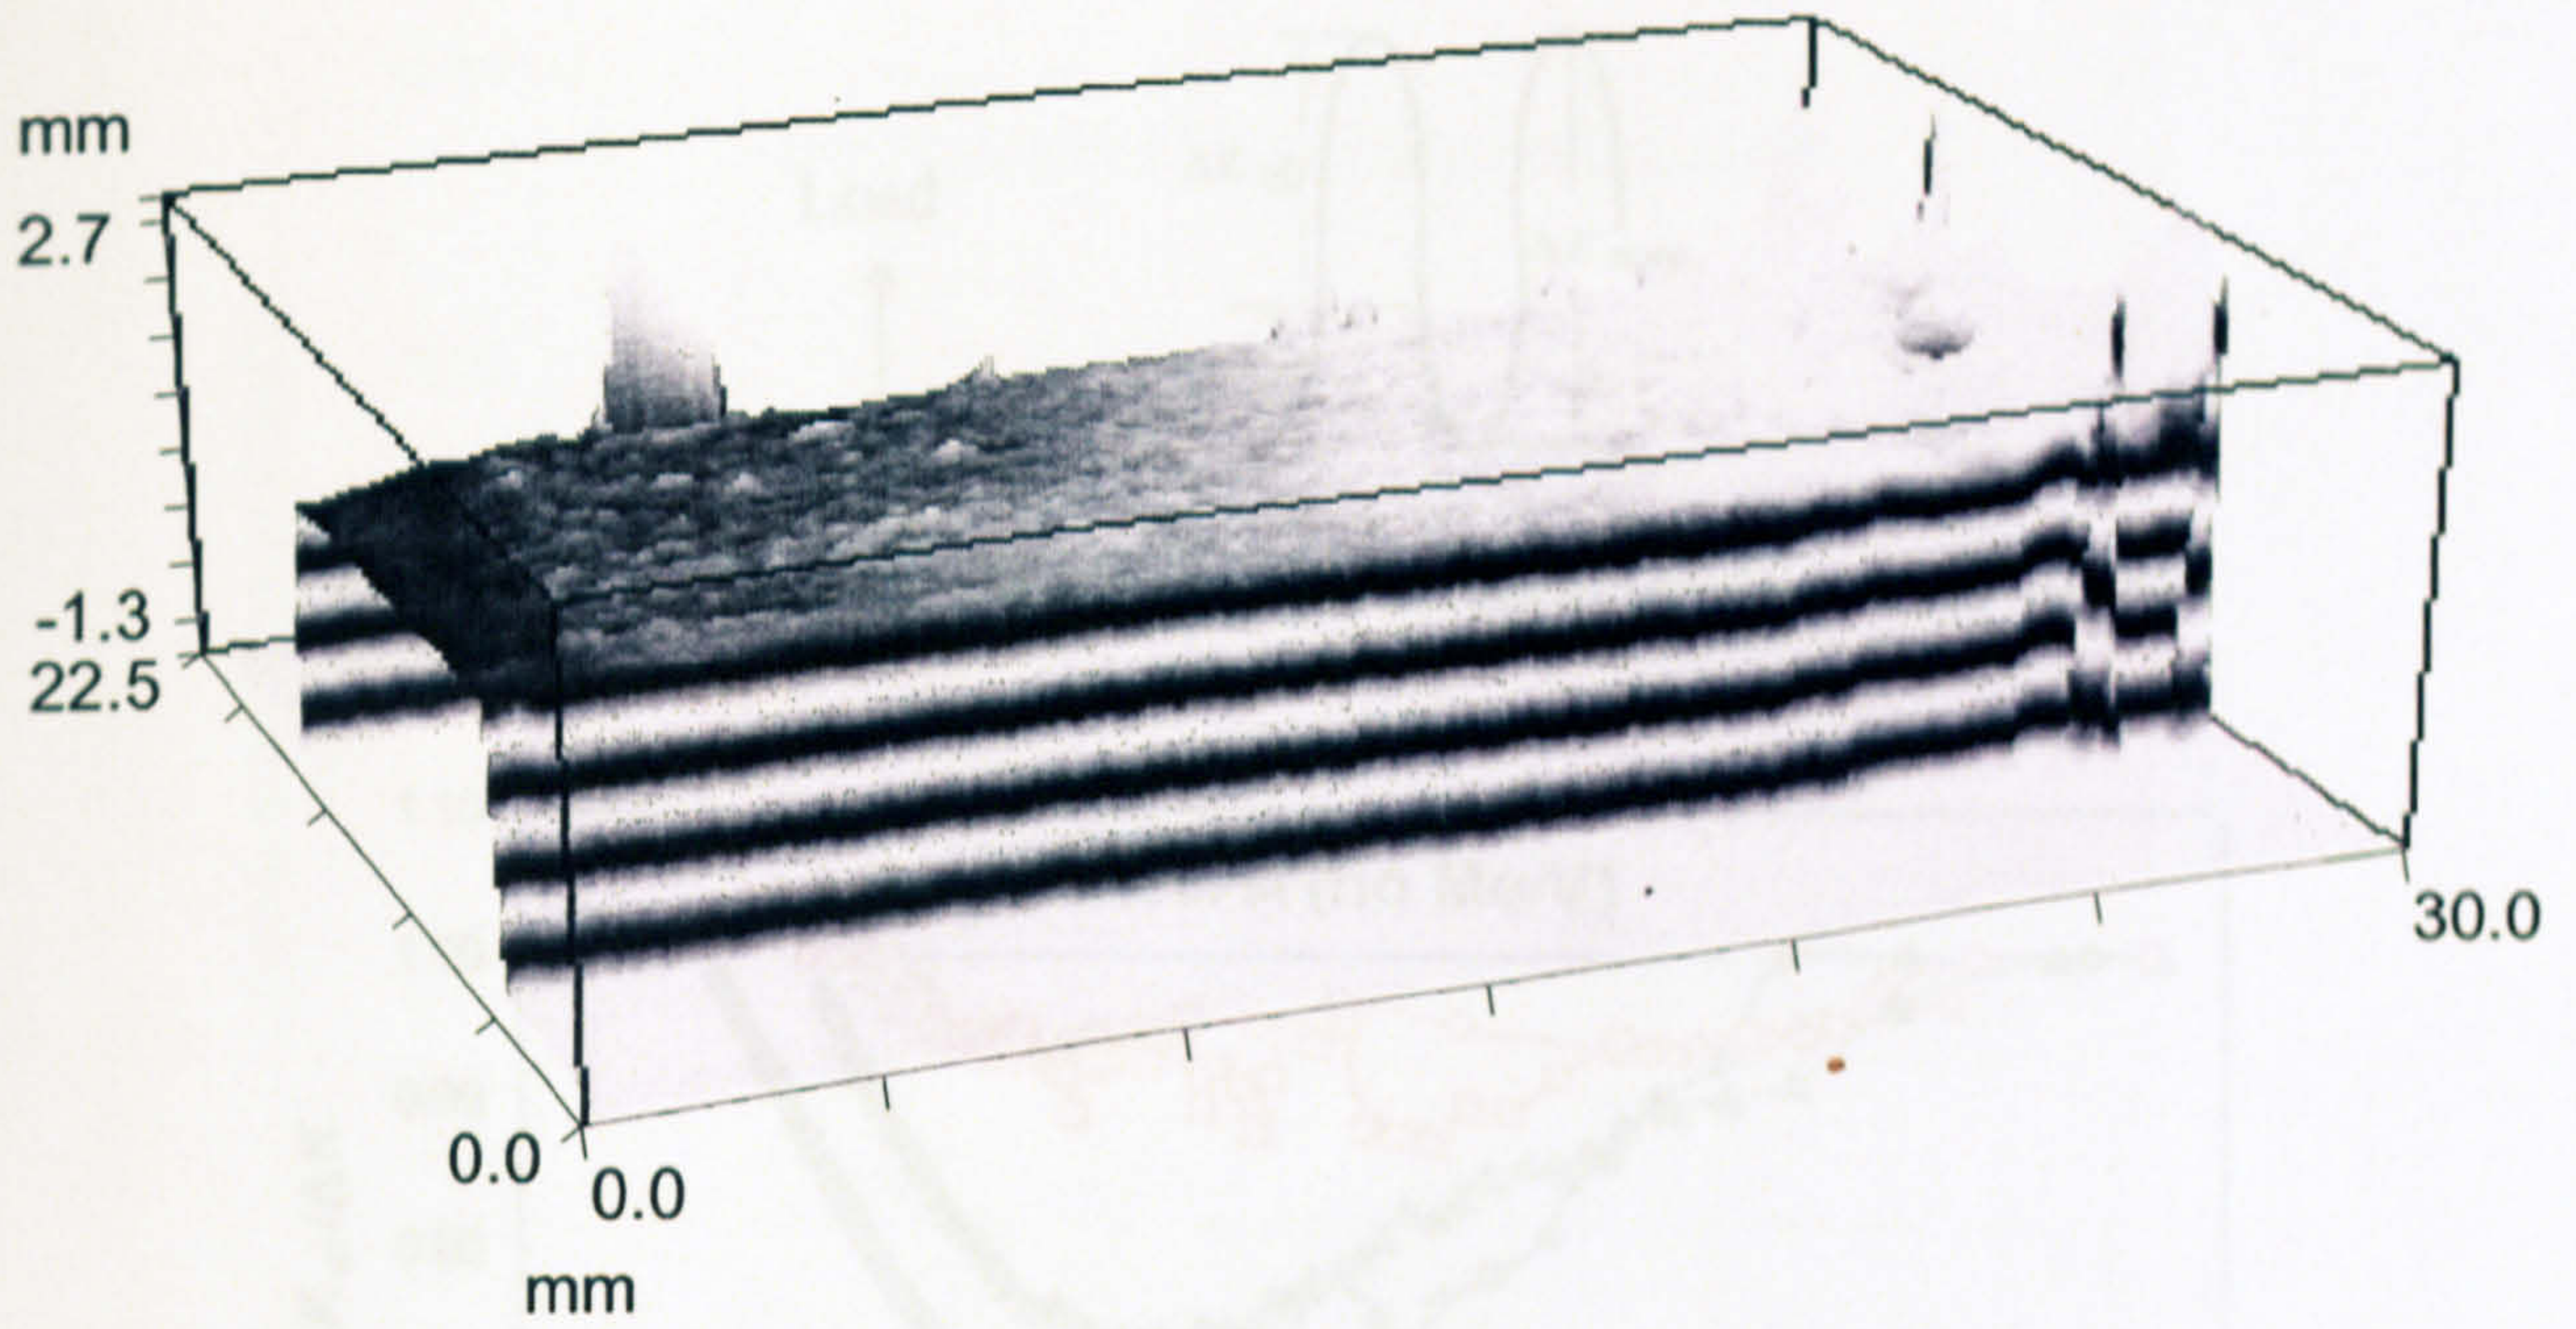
Surface roughness outline of fatigue fractured specimen in air
